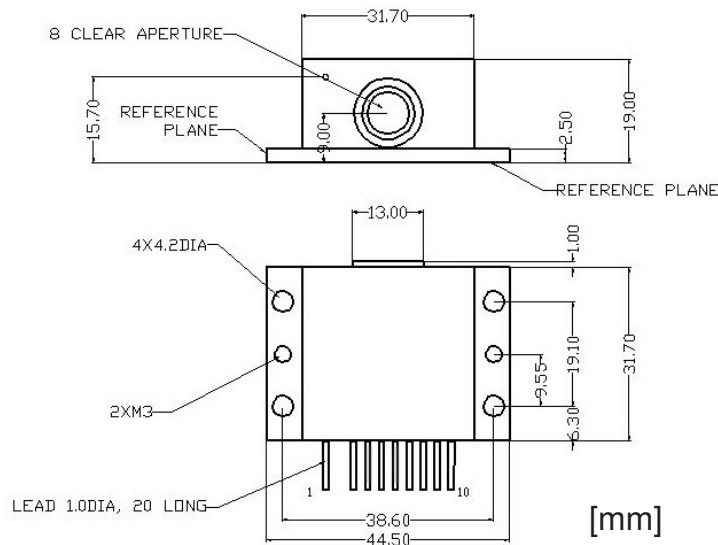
Support mounting for HHL-229 (specifications of the HHL-L module)
